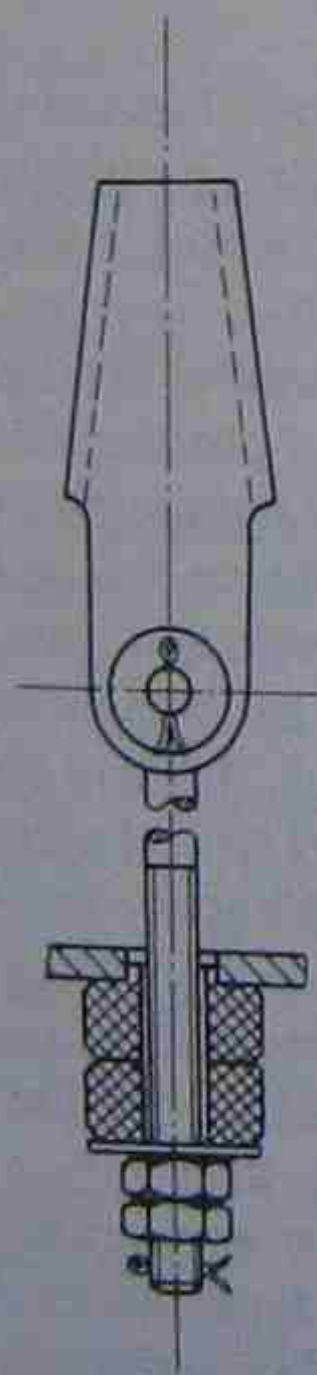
Suspension device with rubber buffers (Gustav Kocks GmbH).
